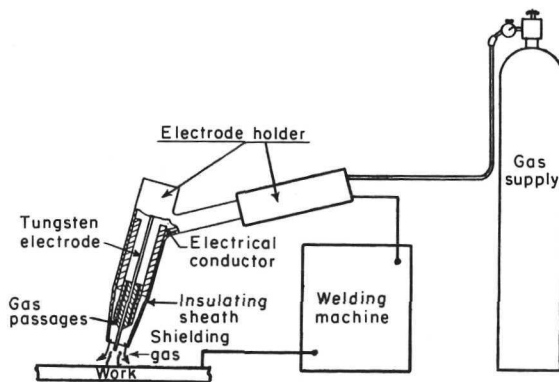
Gas-tungsten-arc-welding process.
